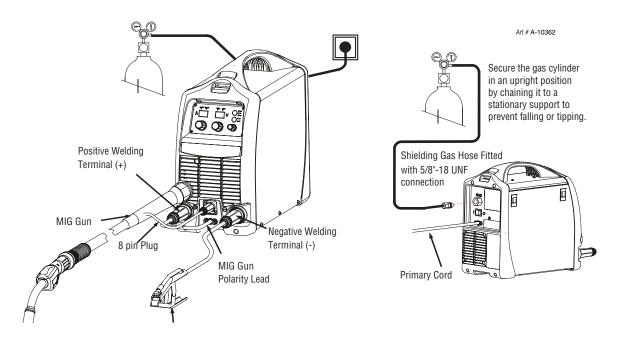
Setup for MIG Welding with Gas Shielded MIG Wire
